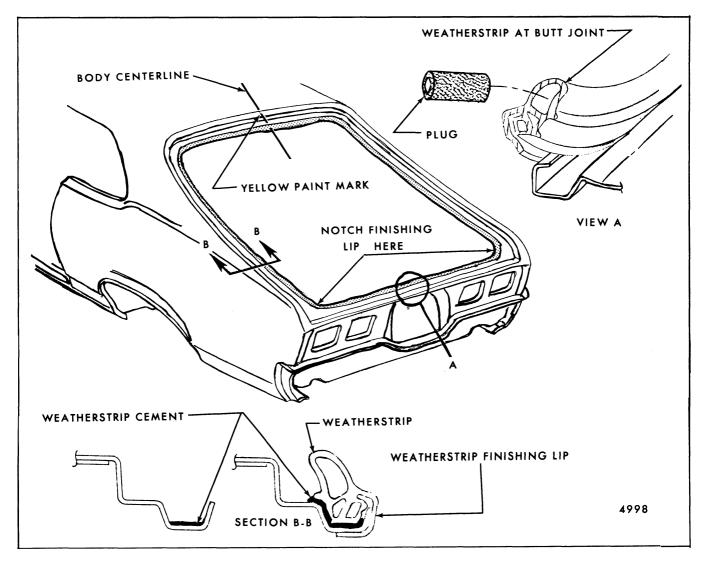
Rear Compartment Weatherstrip - "X-17" Style
